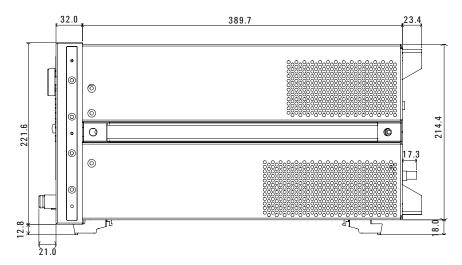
Main unit dimensions (side view, in millimeters, nominal)
